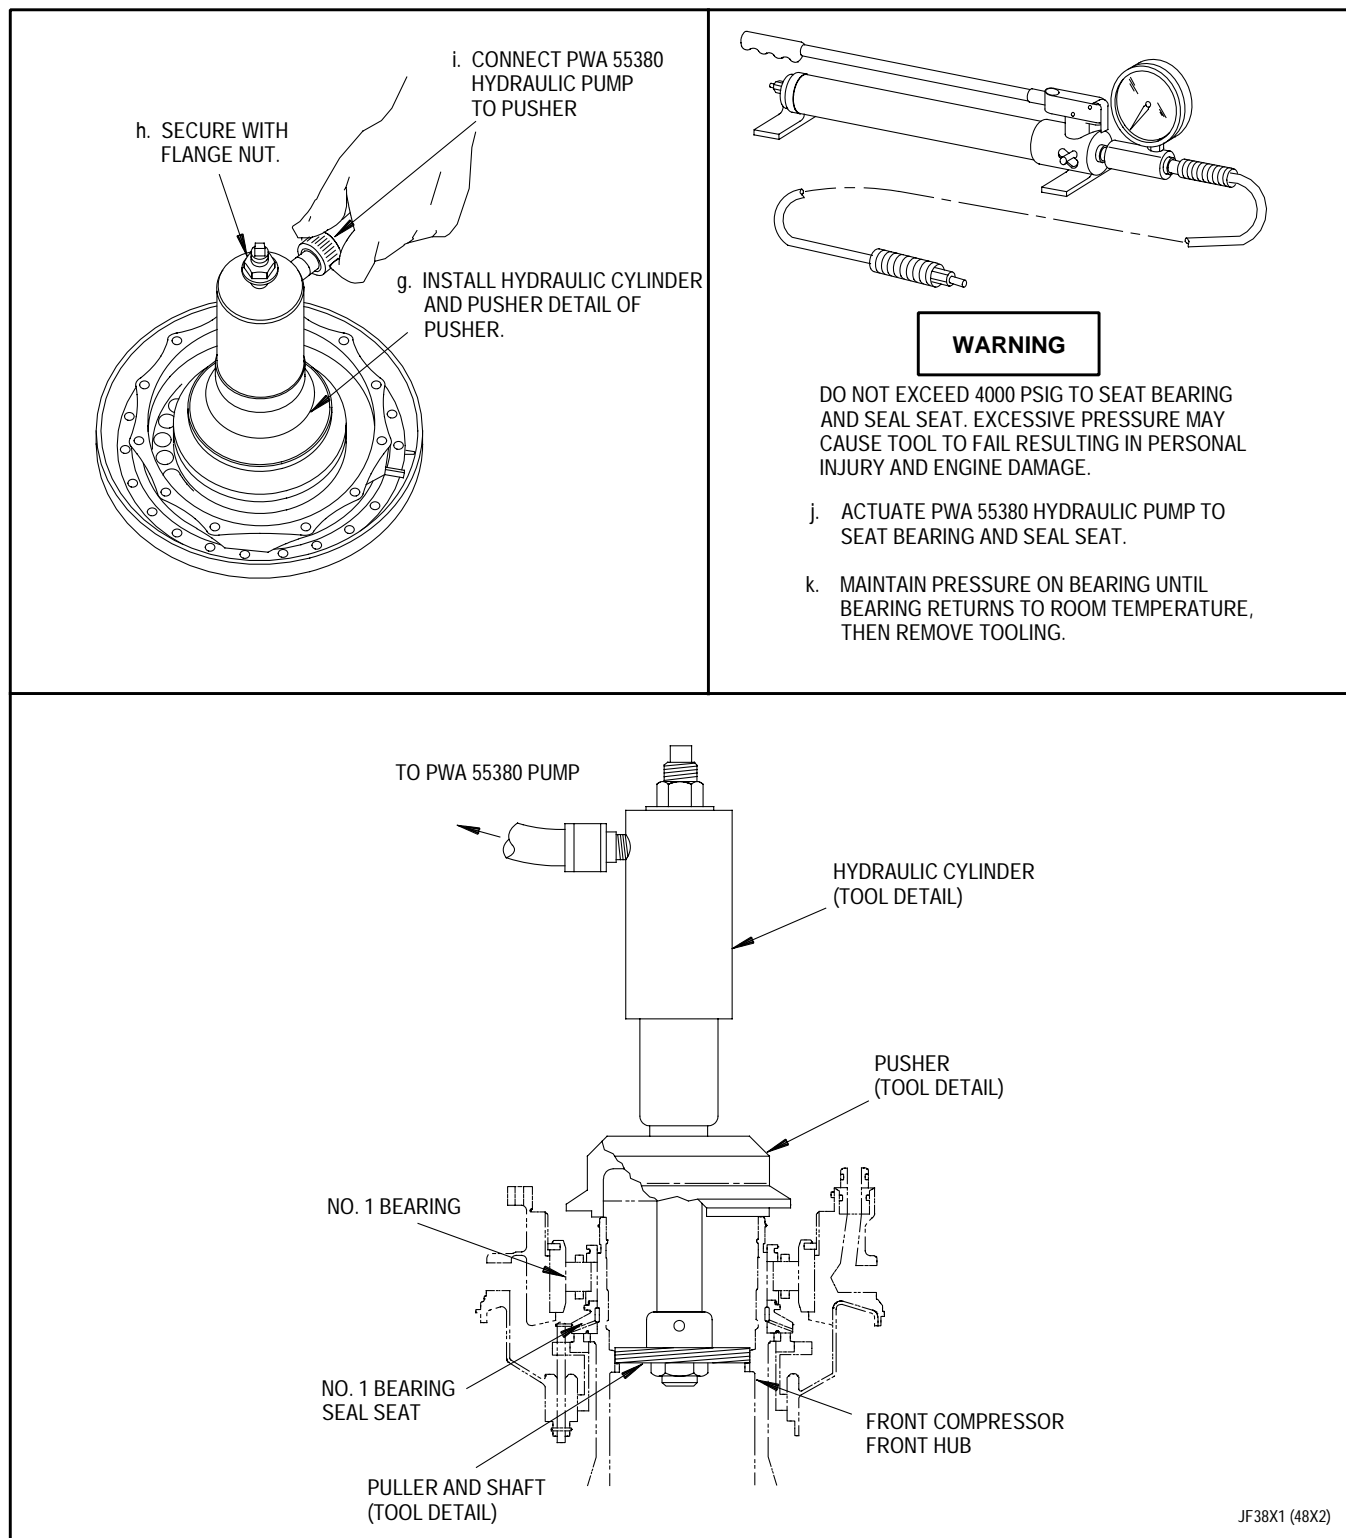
No. 1 Bearing Installation Using PWA 53889 Pusher (Sheet 2 of 2)
